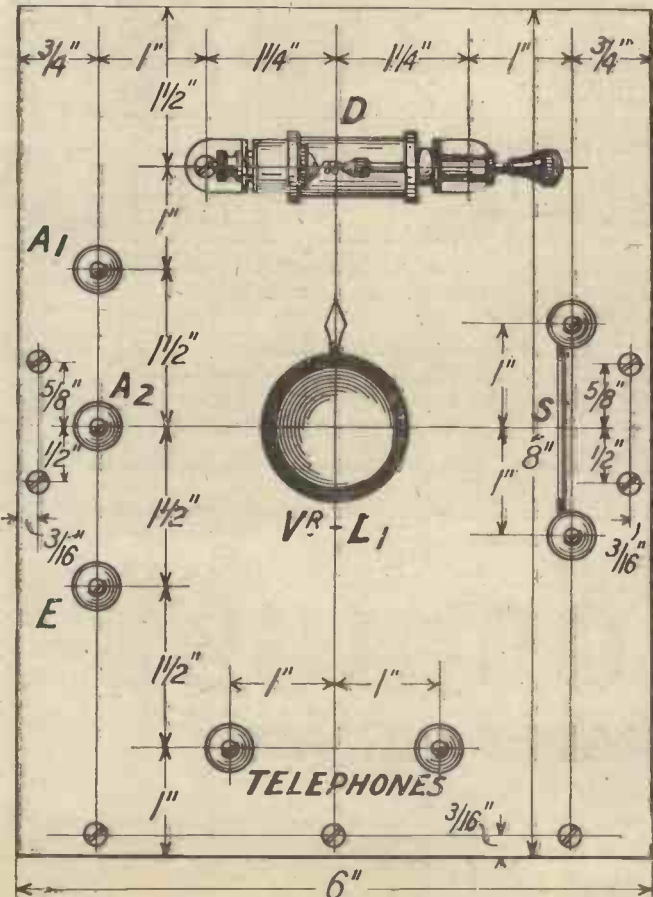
Drilling dimensions for the panel layout are given here. Blue-print C 1042A.
